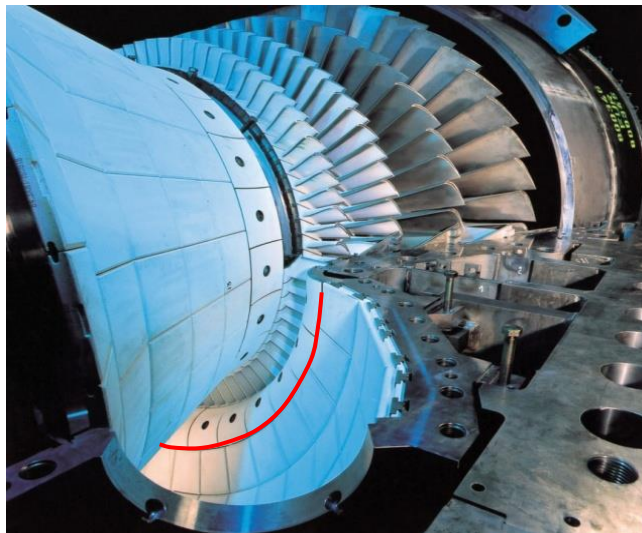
Photograph of a Siemens SGT5-4000F gas turbine engine, with the outer casing removed revealing the combustion chamber and turbine blades; the combustion chamber tiles are highlighted in red.
